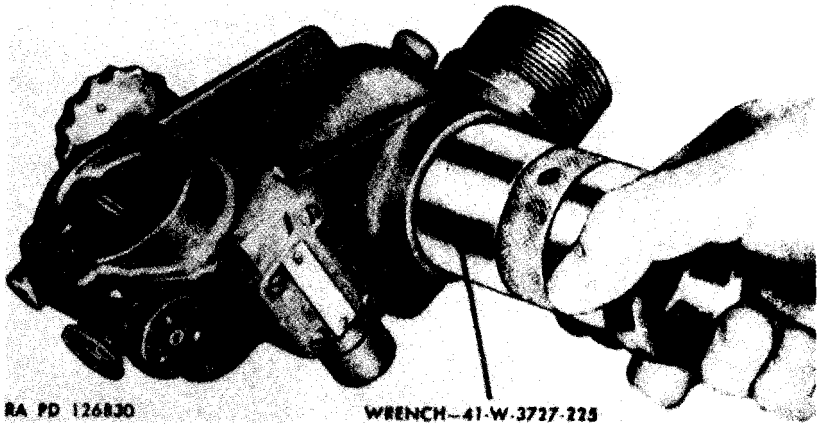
Removing retaining ring A316668 with wrench 41-W-3727-255.
